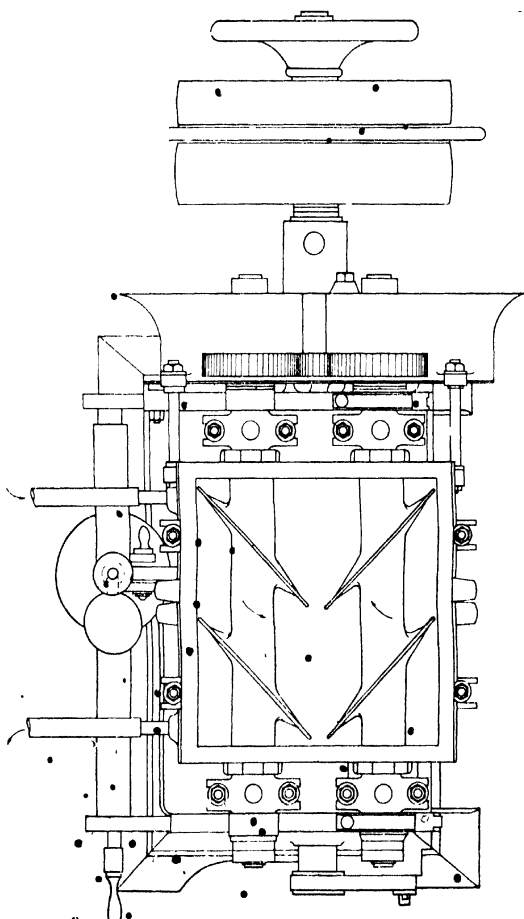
Incorporating Machine (Werner and Pfleiderer Type).
